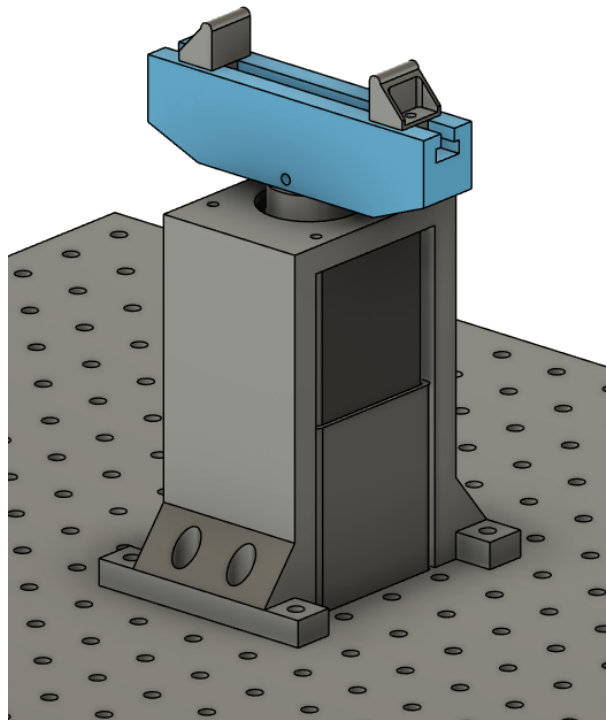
Fourth design of fatigue load applicator with motor.
